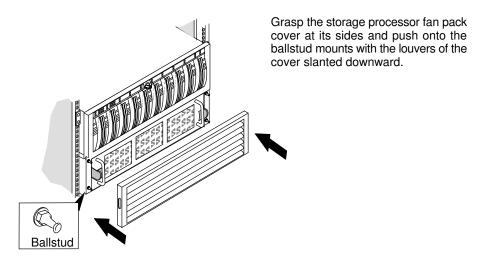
Replacing the storage processor fan pack cover on the DAS 5700/4500 drawer
